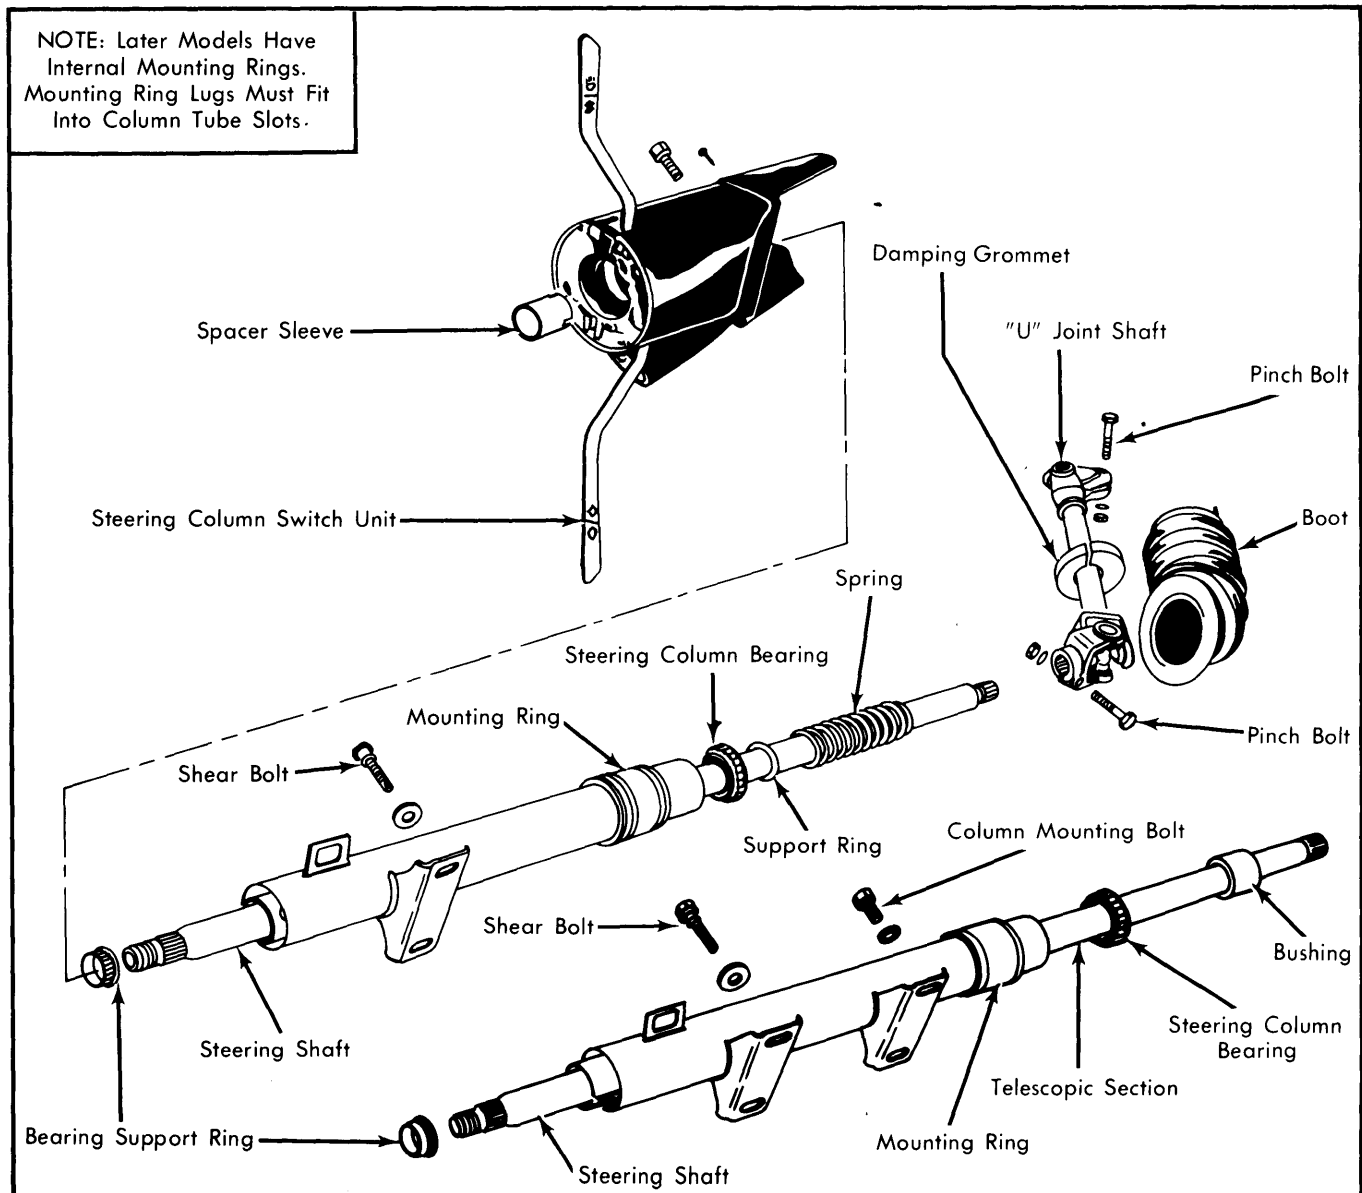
Exploded View of Steering Shafts. Top Shaft is Type Used on Manual Transmission Models. Bottom Shaft Shown is Type Used on Automatic Transmission Models. Upper and Lower Portions of Each Shaft are Same.
